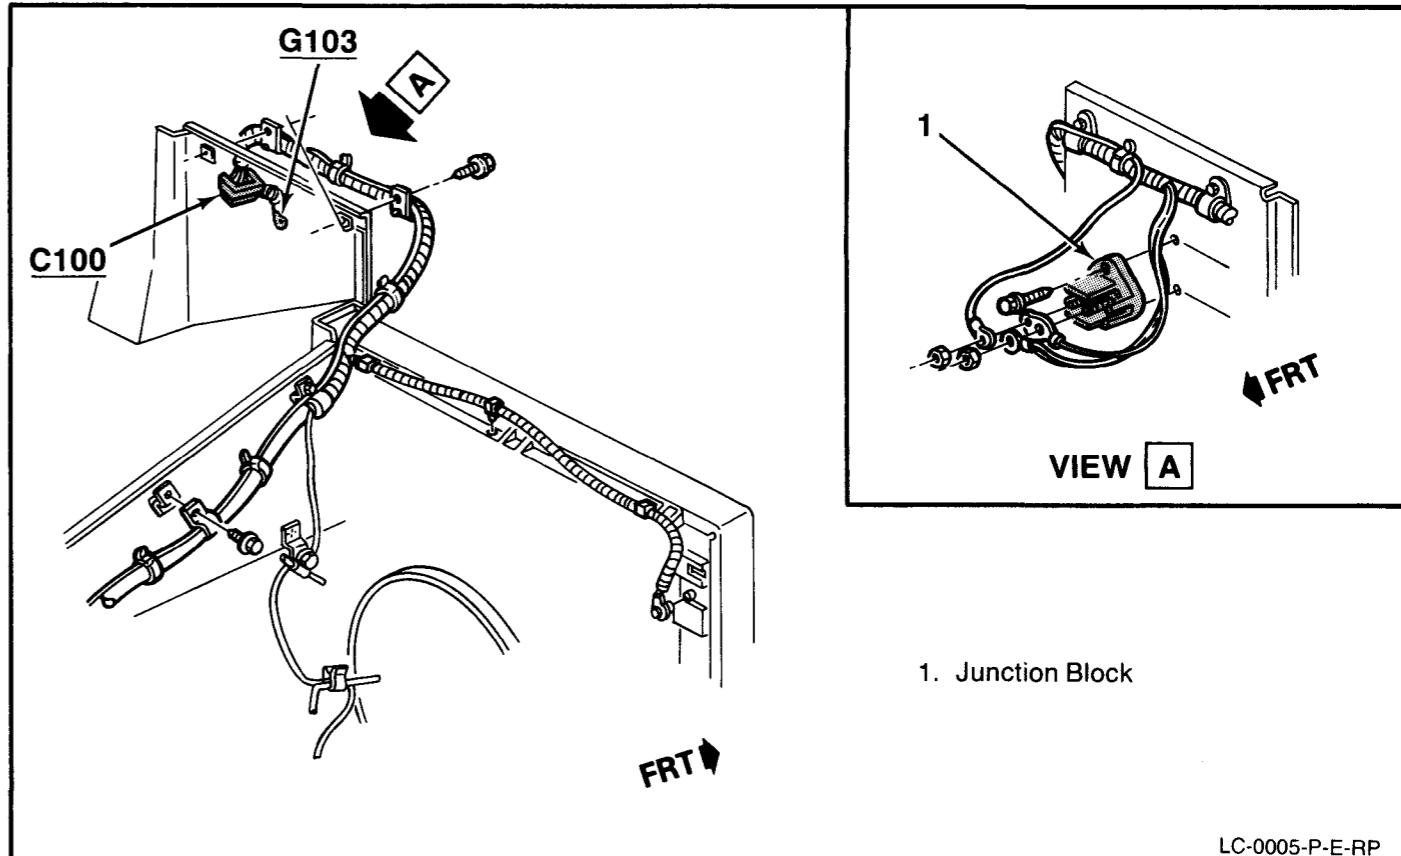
Engine Wiring Harness to Cowl/Radiator (RPO LL4 w/P32)
